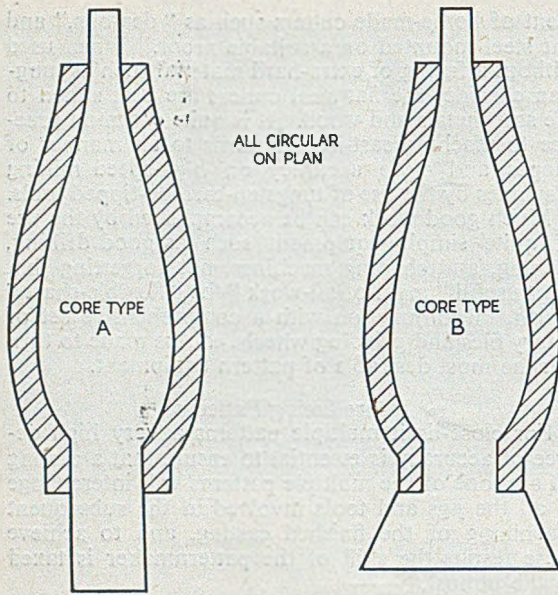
Modifications of Core-print Design. Core Type A, requires a Drying Shell, whereas Type B stands on its Enlarged Base for Drying.
